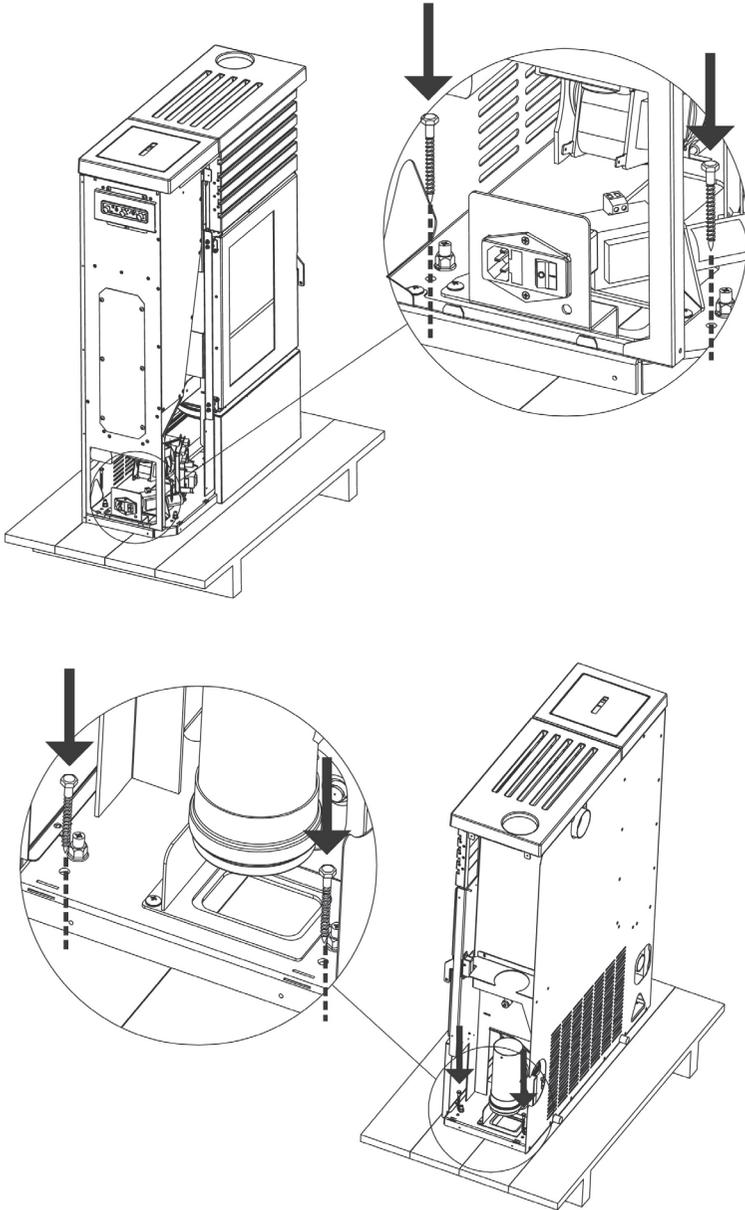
STOVE PACKAGE FASTENING SCREWS
